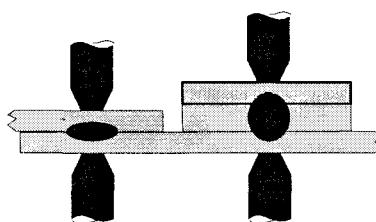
2-sheet and 3-sheet application with same welding parameters
